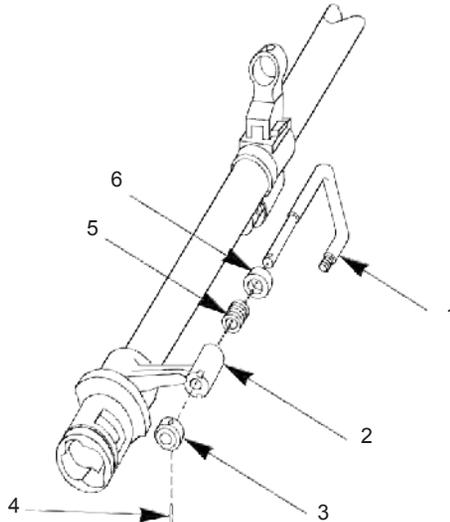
Handle, Spring Pin, Collar, Spring, Bushing.
